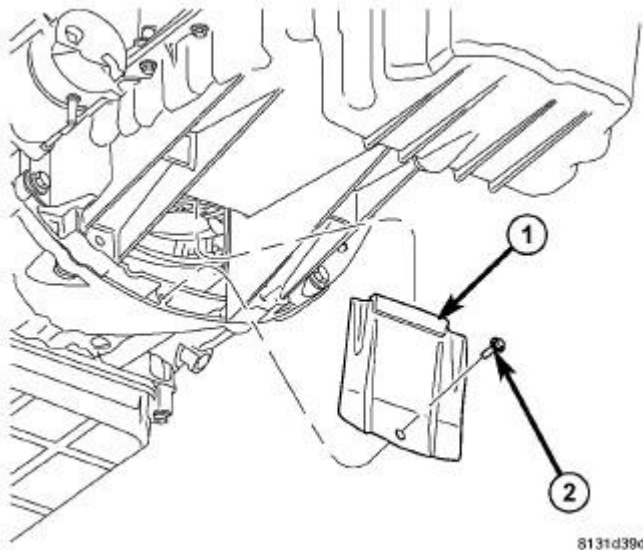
Identifying Torque Converter Access Cover & Fastener
